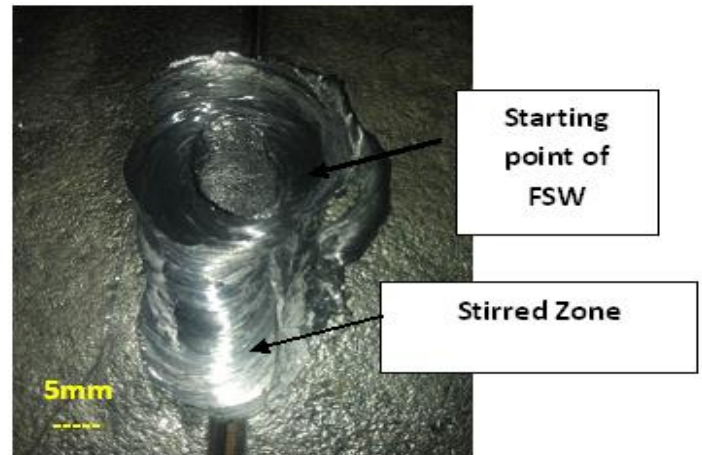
Welded lead alloy plates by semi-automated FSW machine.
